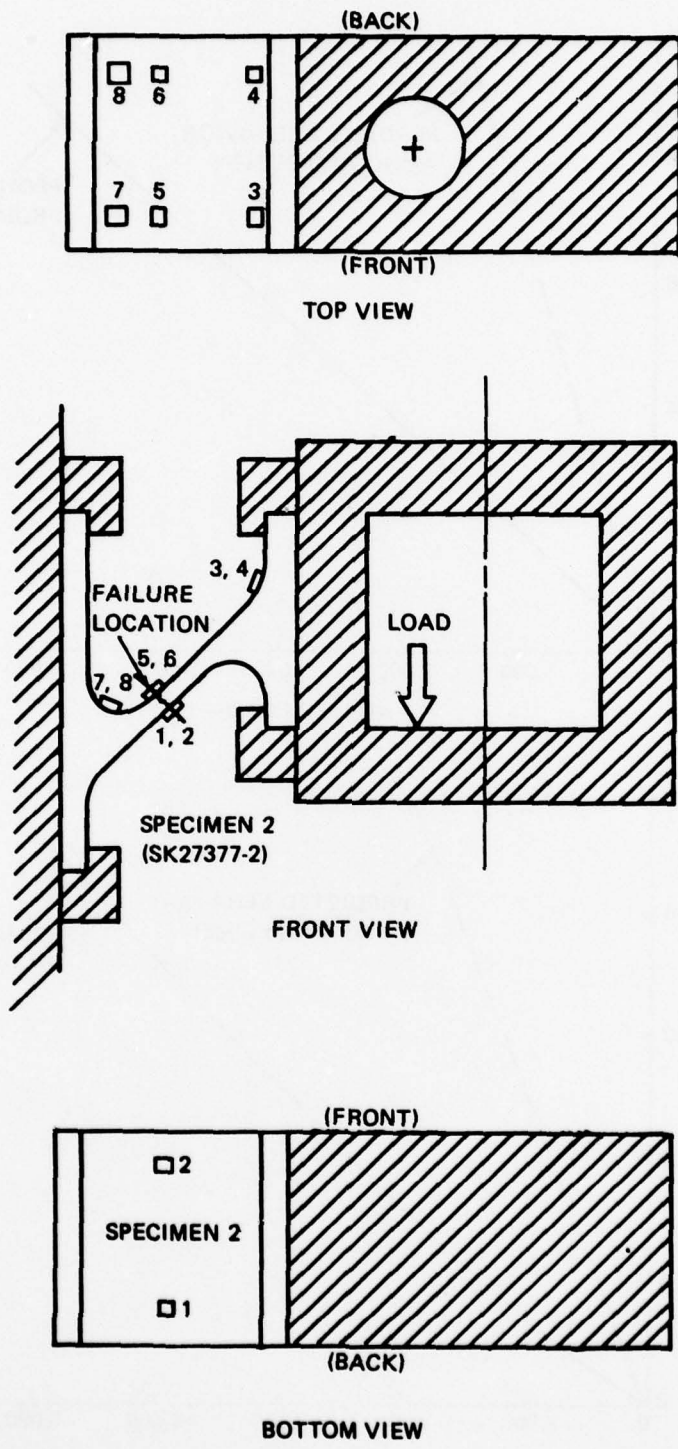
Single-Specimen FP/Magnesium Test Specimen Setup.
